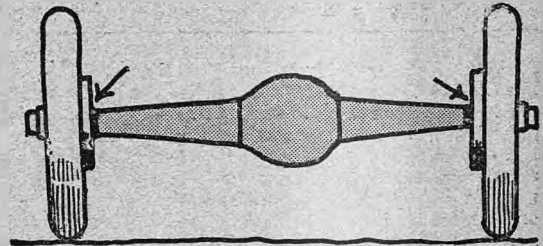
The arrows indicate the wheel bearings which wear most rapidly.
